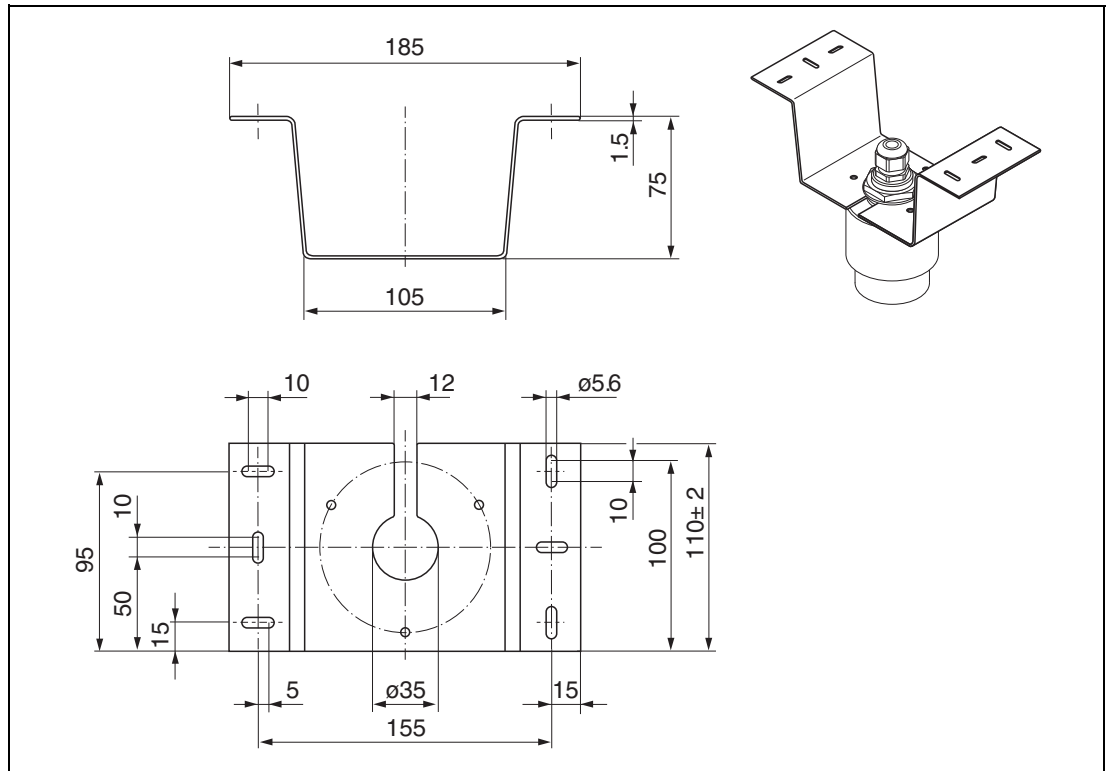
Dimensions of ceiling mounting bracket, engineering unit: mm (inch)
